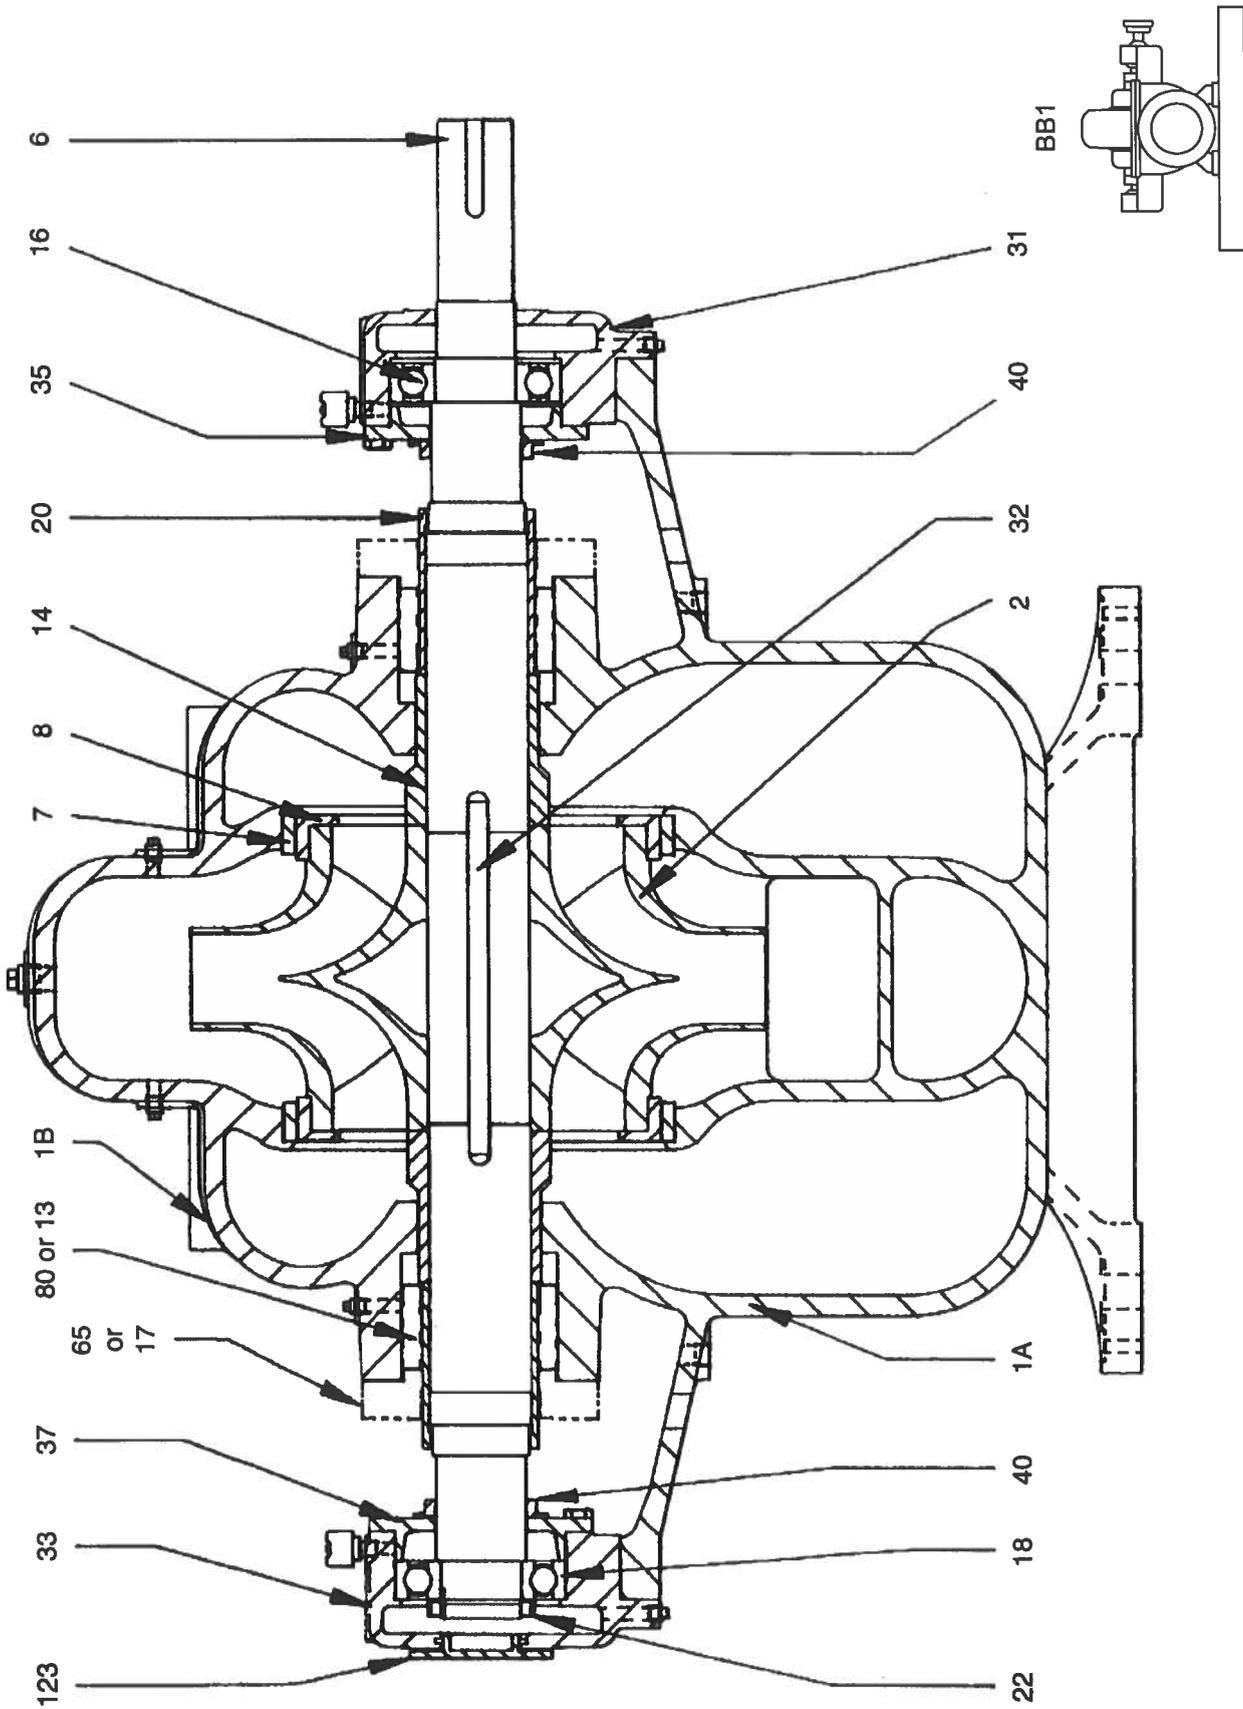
Impeller between bearings — flexibly coupled — single stage — axial (horizontal) split case
